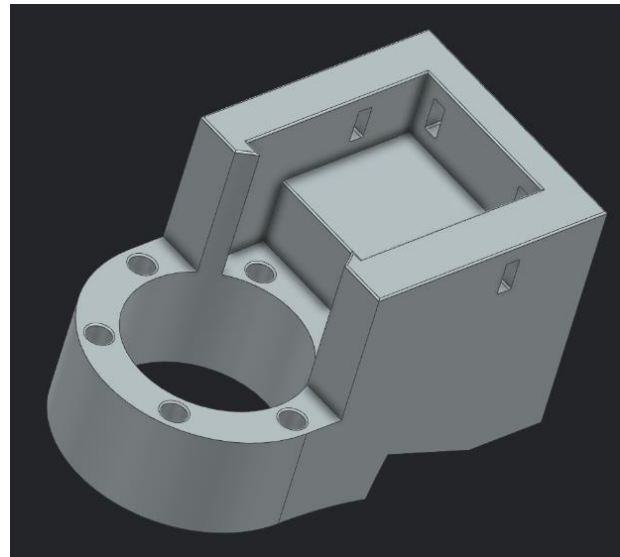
3D-Printed Flange Interface and Linear Actuator Mount
